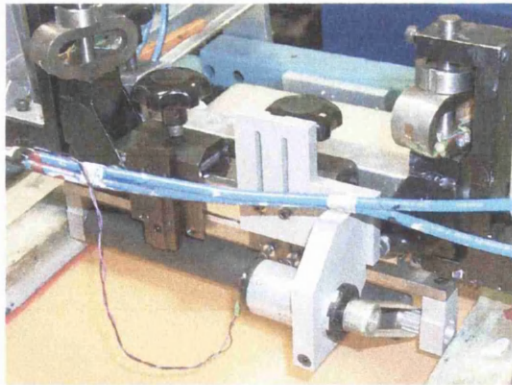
Roller Squeegee and Drive Mechanism on Flat-bed Press
